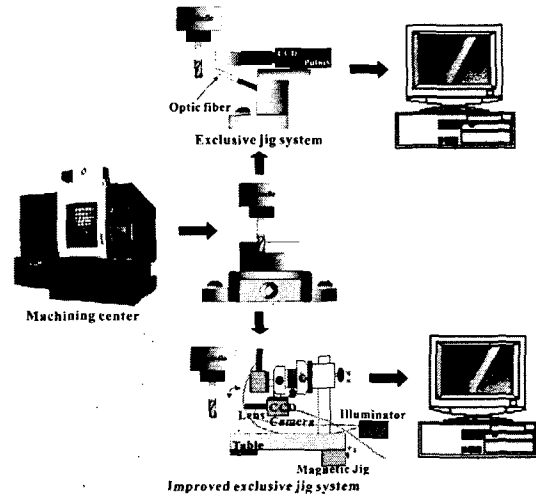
Schematic diagram of experimental setup using exclusive jig system and improved exclusive jig system
